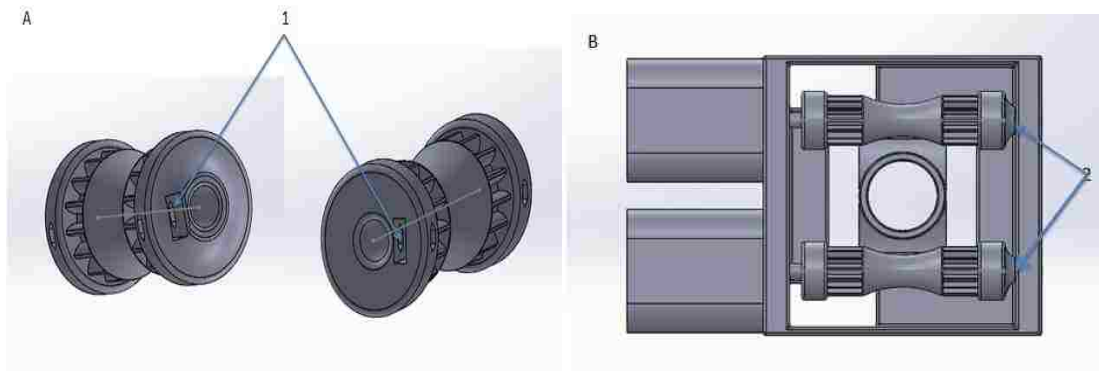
Partial assembly process of the stretching device: A-1.Holes for holding the grub screw nuts; B-2.Relative position between gears and base
